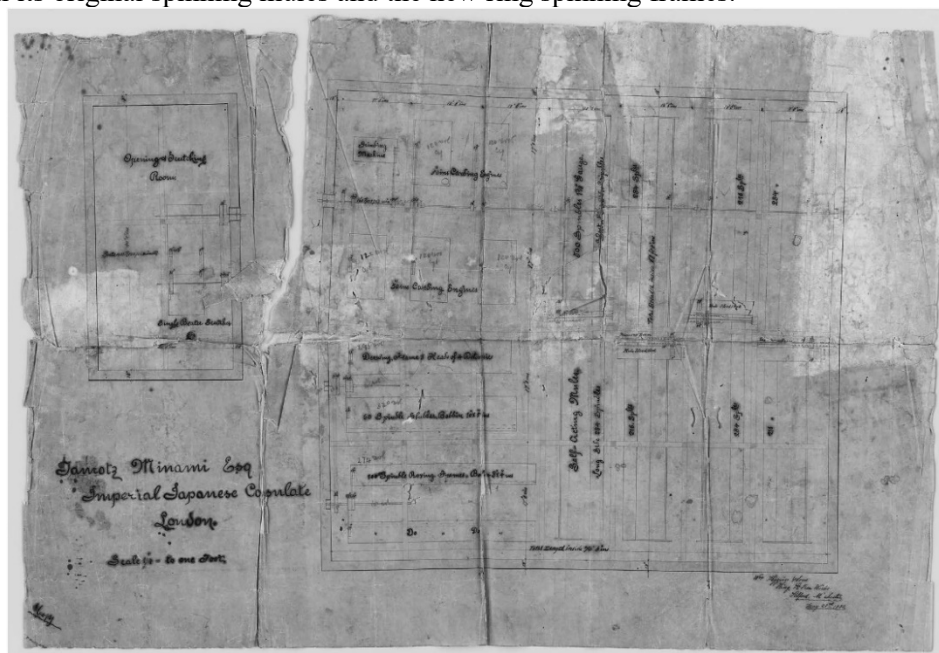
Machinery layout drawing for a prototype 2,000-spindle mill [1-01]
